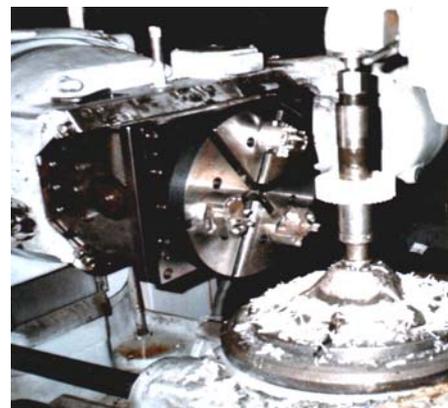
Milling head ($i_c = 3$) adapted on machine tool.
